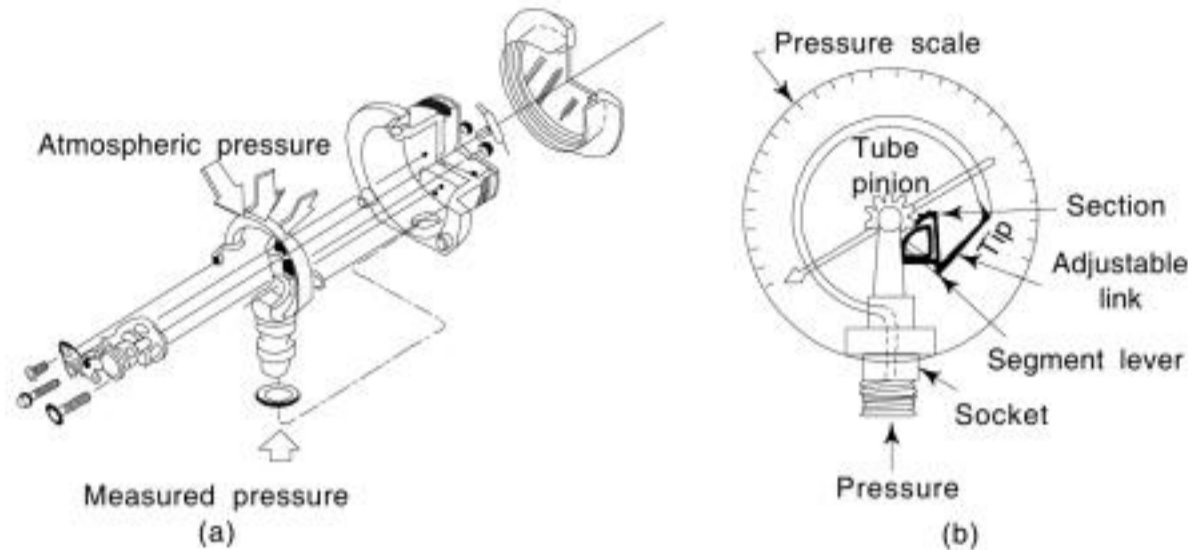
(a) Pressure Gauge (Exploded View)
